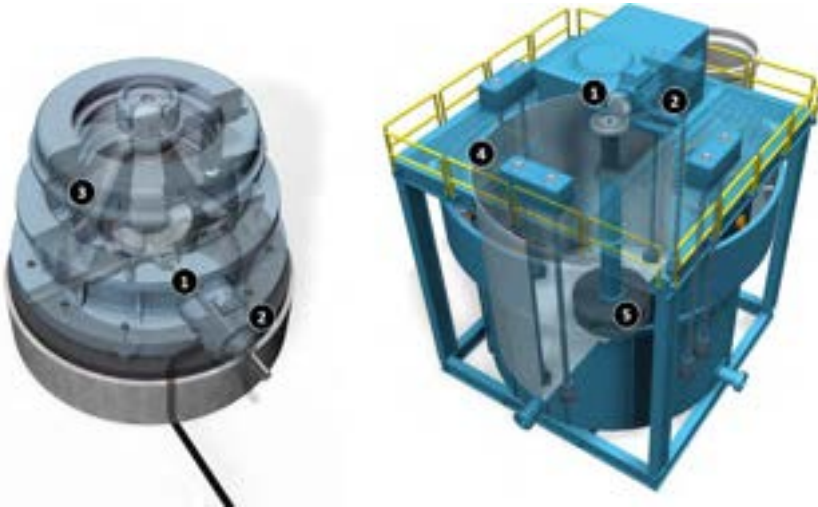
Common engineering adhesive maintenance and repair applications for crushers and flotation cells, equipment typically used in the processing of minerals: (1) retaining of gears and bearings in rotating equipment; (2) threadlocking of rotating equipment threaded fasteners; (3) backing of steel wear liners; (4) bonding of rubber wear liners; (5) rebuild of rubber impeller. Credit: Henkel, Adhesive Technologies, www.henkel.com.
